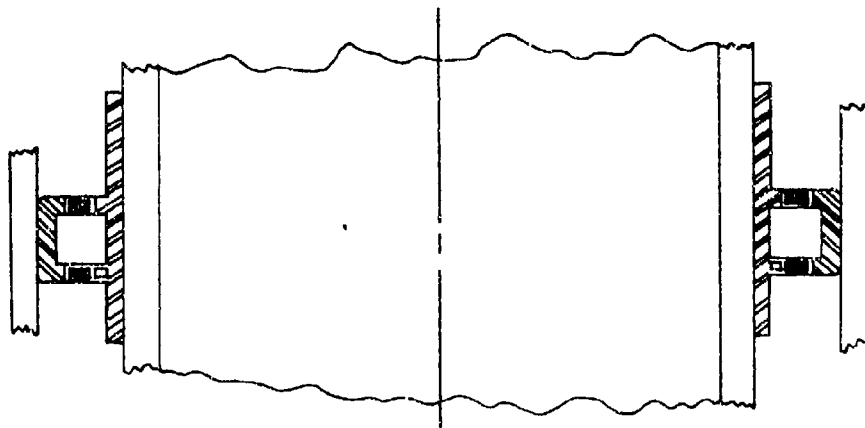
ROLLER BEARING WITH EXTENDED INNER RACE
